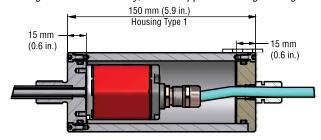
Model RS Rod-style sensor dimension reference (shown with Type 1 housing)
